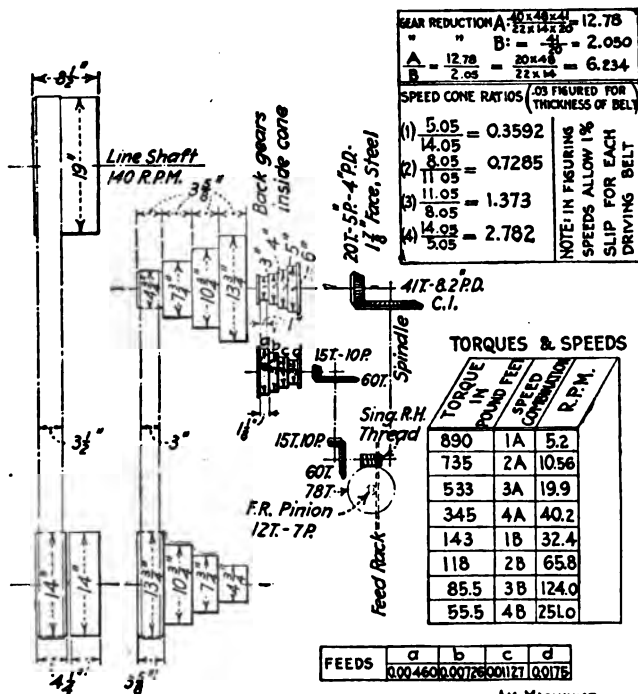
Original arrangement of a 30-in. vertical drilling machine.
